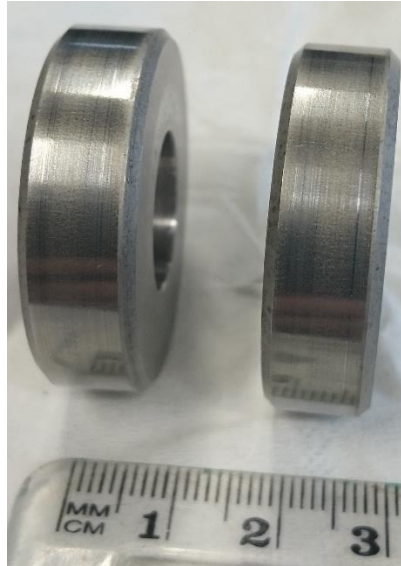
Photo of the wheel samples after 280 hours of the lubricated test, the left wheel is top wheel, the right is the bottom wheel
